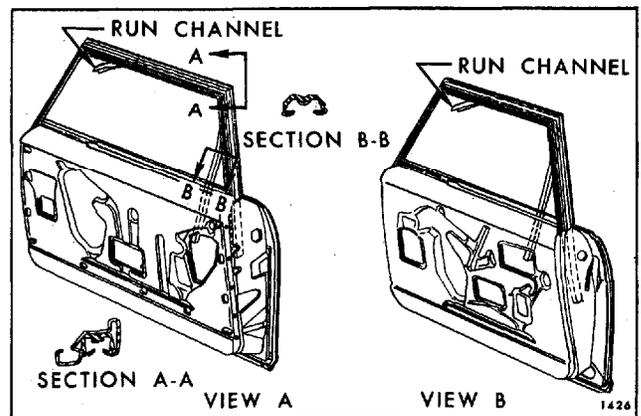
Front Door Glass Run Channel Assembly - "X" Closed Styles
